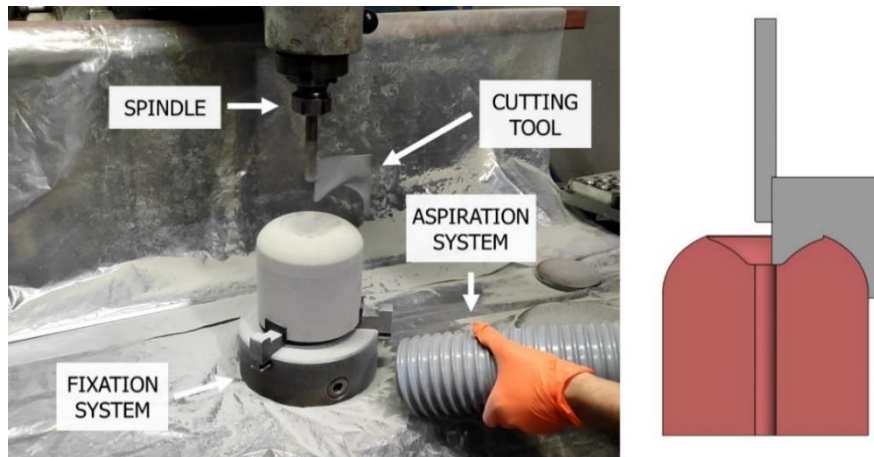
Photo of the machining operation in the milling machine and a representation of the tool design.
